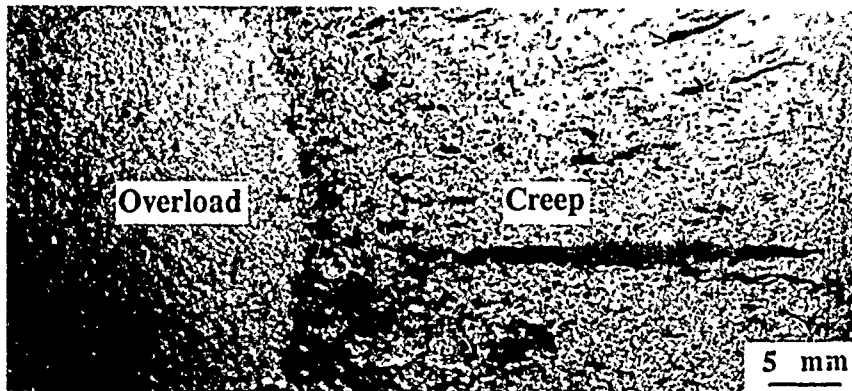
Macroscopic view of fracture surface produced by creep cracking at 120°C showing 'flaky' appearance
